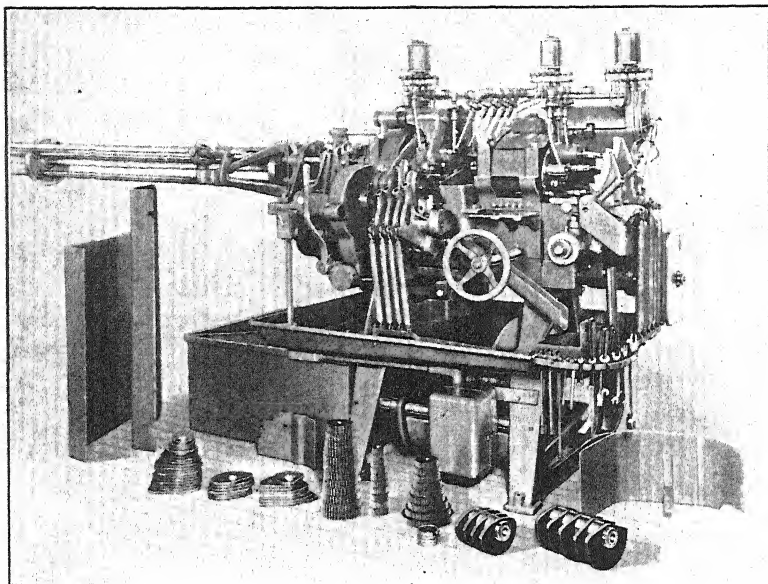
The Davenport Model "B" 5-Spindle Automatic Screw Machine Arranged for Motor Drive with the Motor Located Underneath the Machine.
